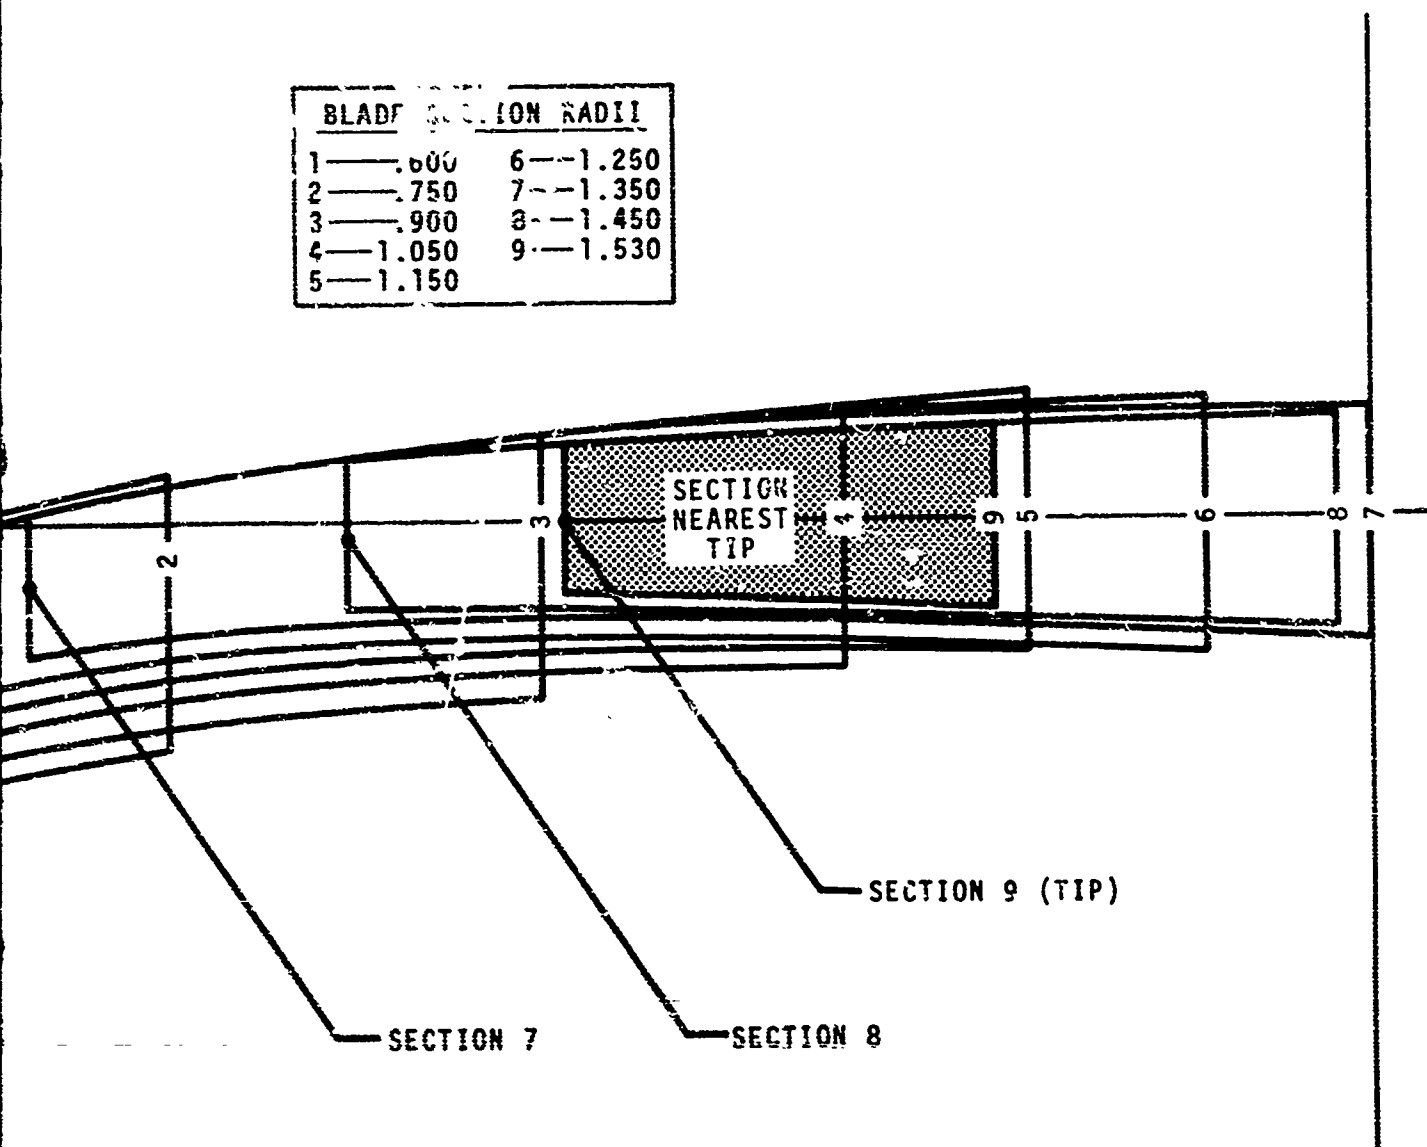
Composite of Impeller Blade Manufacturing Cross Section.
